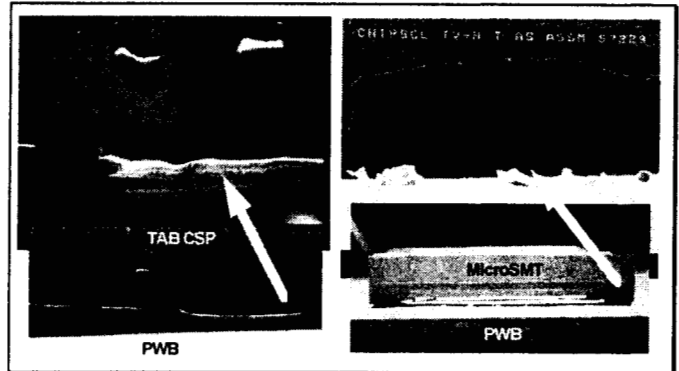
Good Solder Joint Quality of a Grid CSP and Poor Solder Joint Quality of Low I/O Wafer Level
